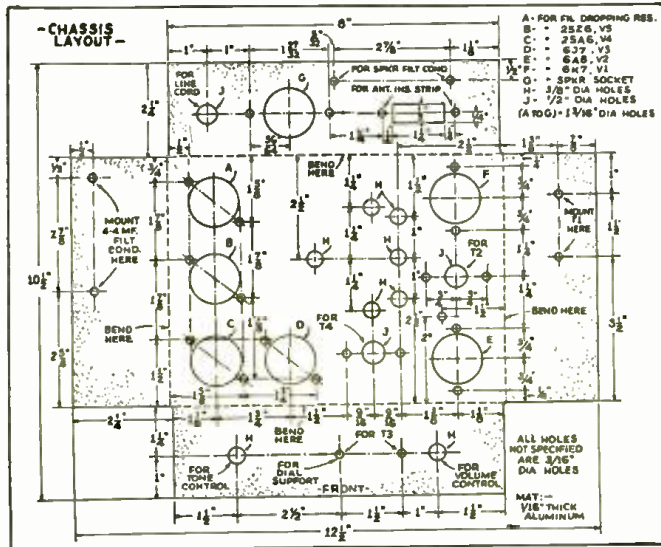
The chassis size and drilling layout. The positions and size of holes are correct only if the specified parts are used. If other than specified parts are used, the constructor must change the drilling details to suit.
